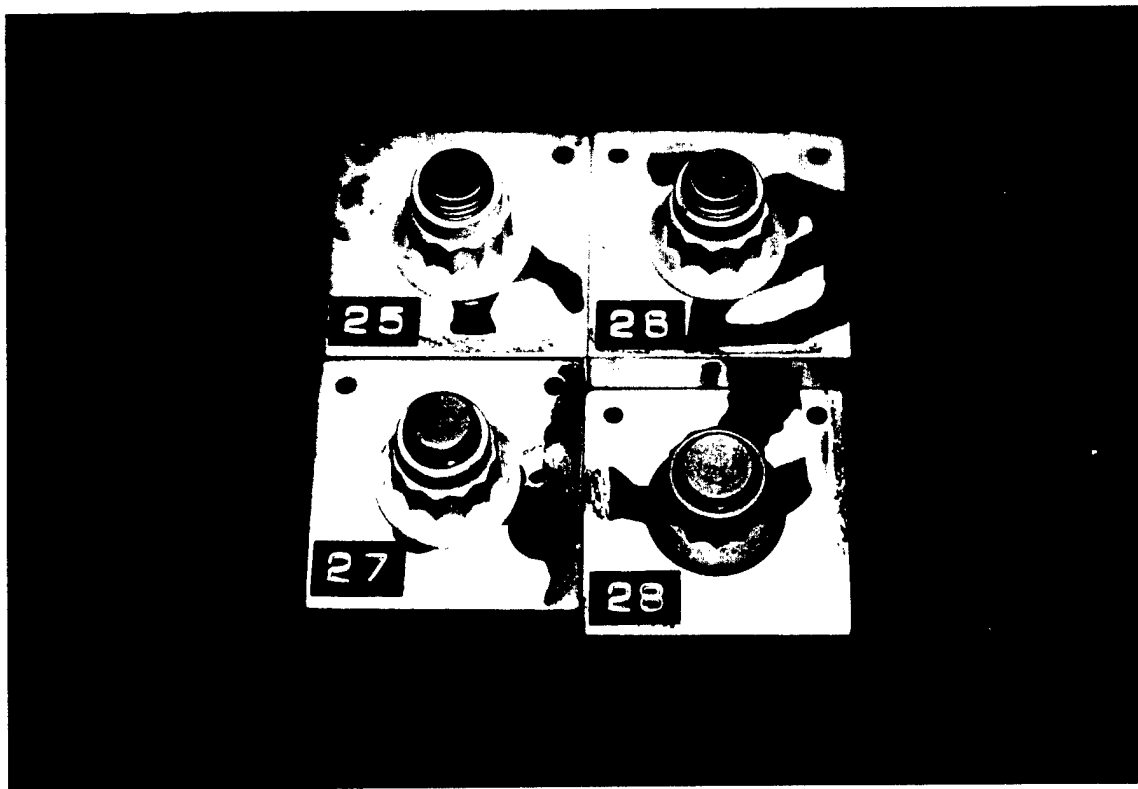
H11 Chromium Hot Work Tool Steel Nuts With Antiseize Solid Film Lubricant (MoS_2) Before Salt Spray Exposure. Reduced 25%.
